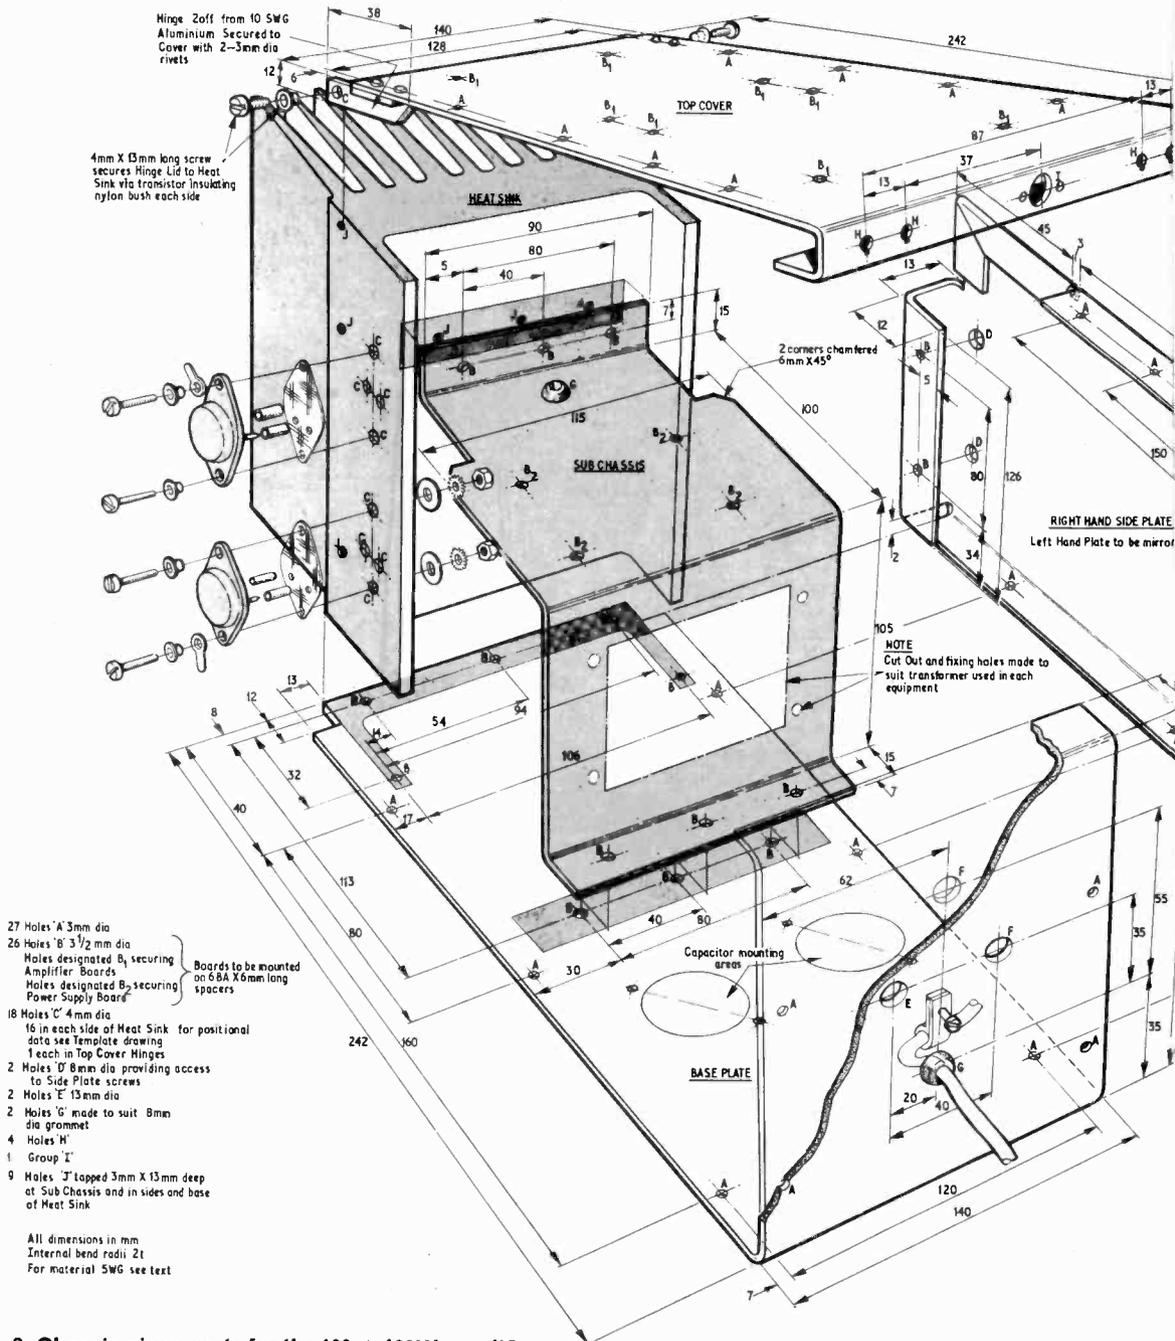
Chassis piece parts for the 100 + 100W amplifier. For the lower power versions the dimensions should be sensibly scaled down
